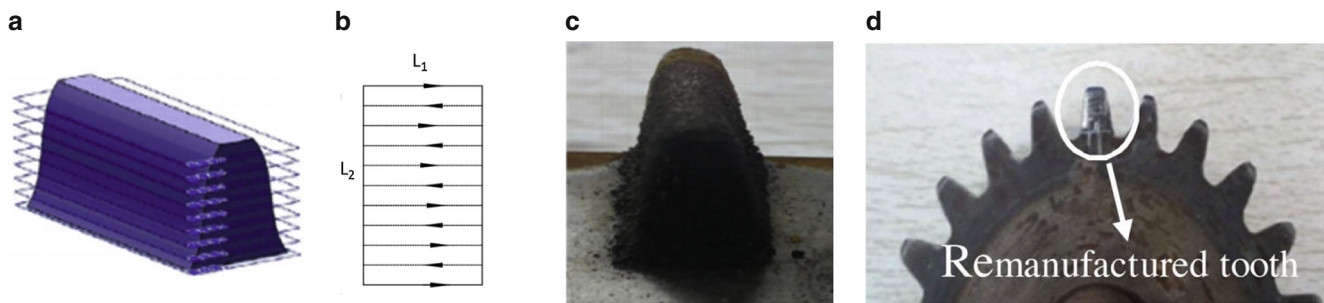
Broken gear tooth repairing process: a slices of the broken tooth model, b the shape of the first layer of the broken tooth model slices, c remanufactured tooth using DLD, d remanufactured tooth after post-processing. Adapted from [10]
